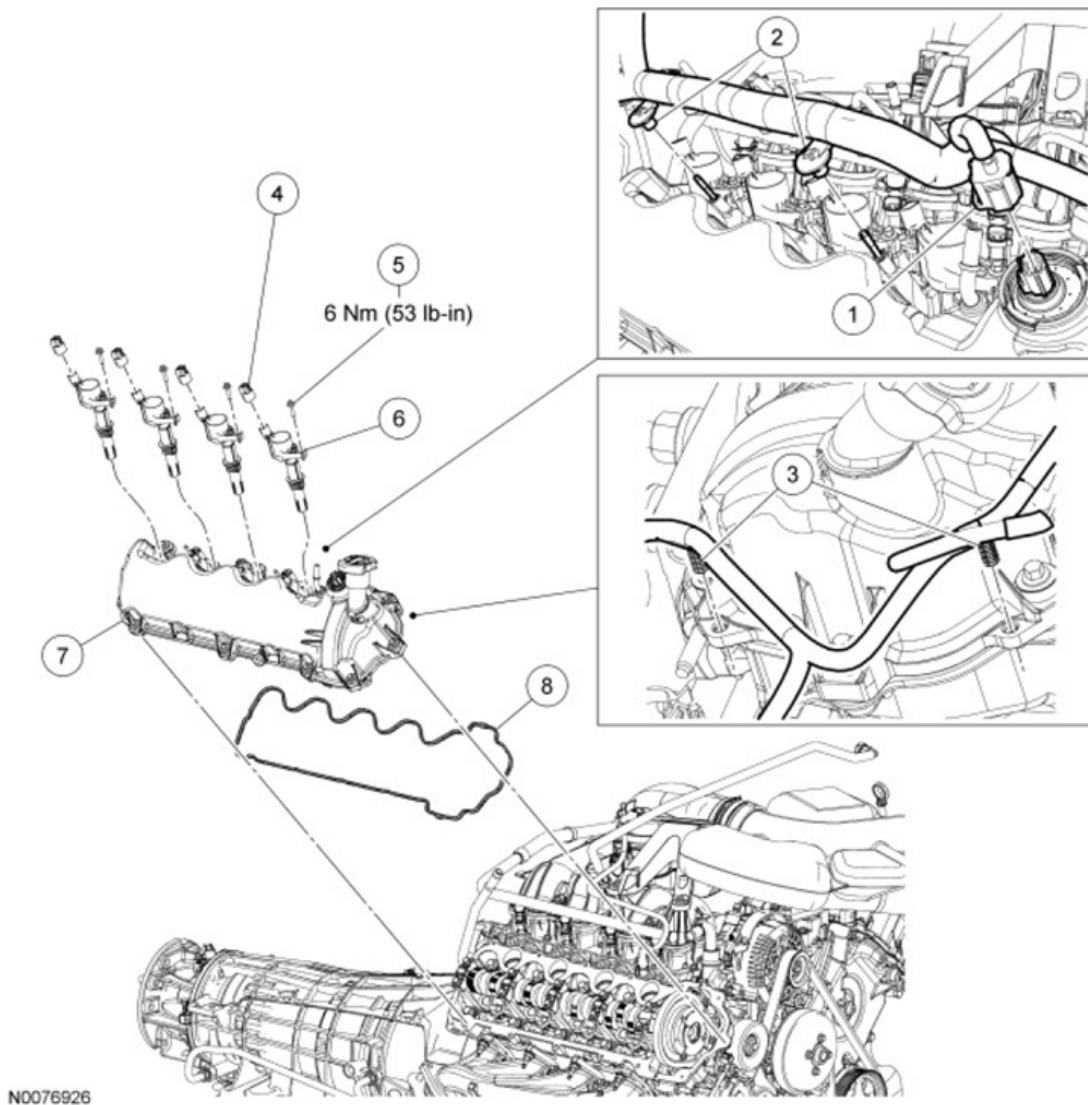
Identifying Ignition Coils, RH Valve Cover And Gasket With Torque Specifications
